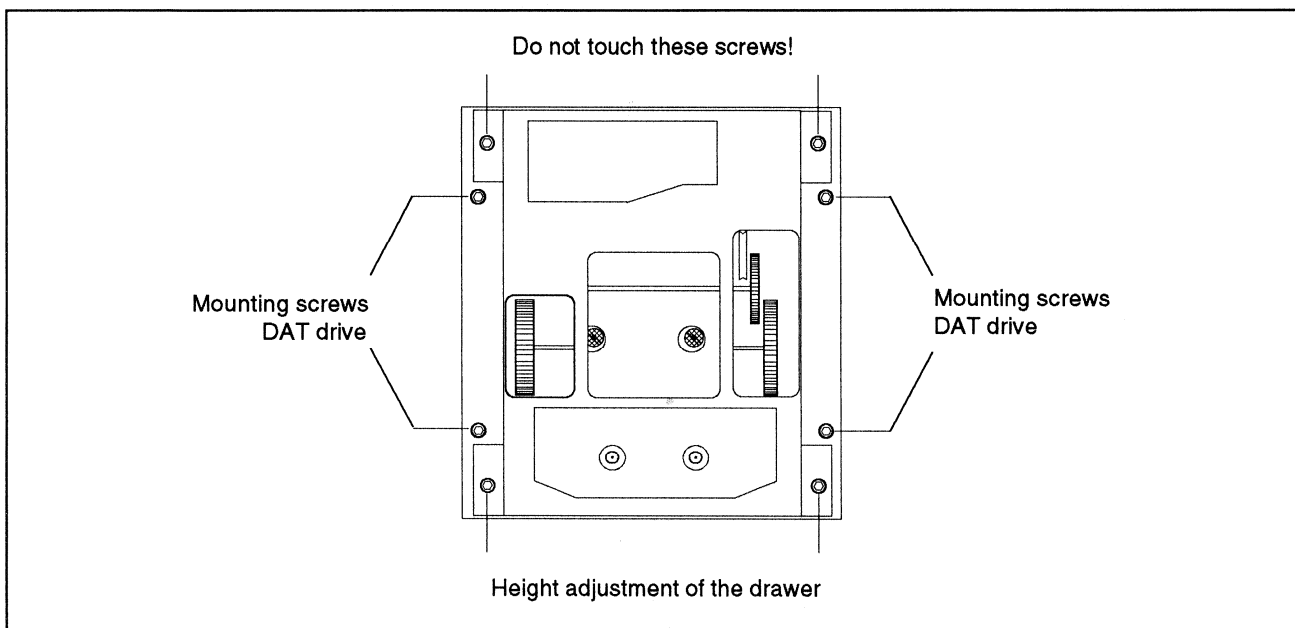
Mounting and adjusting screws of the DAT drive.
